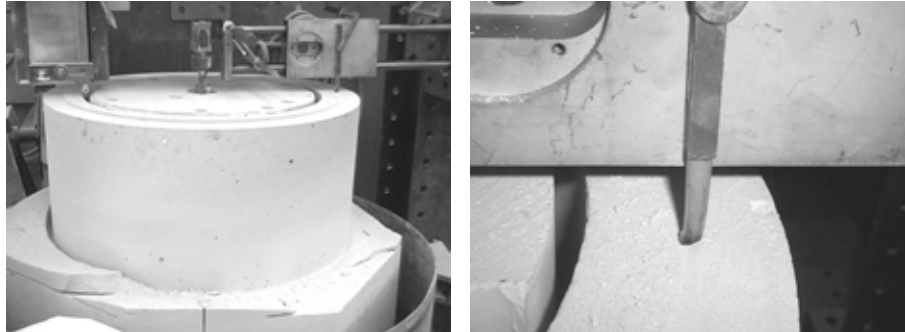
First the upper outer part was milled, followed by the upper inner part (shown on the left), after flattening the surface of cylinder (shown on the right), the cylinder was rotated 180° and the remaining outer and inner part were milled and the surface flattened.
